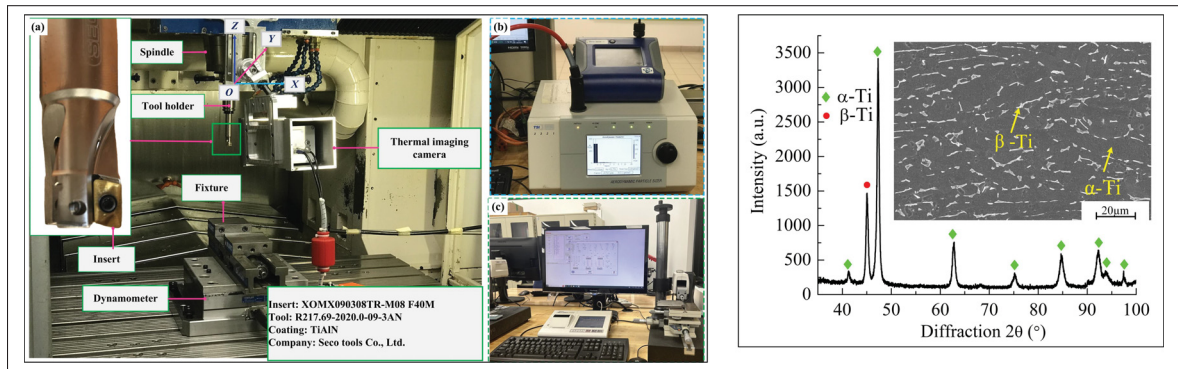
Experimental setup. (a) Machining setup, (b) particle collection unit, (c) surface roughness measurement setup, and (d) microstructure and the phase composition of as-received material
